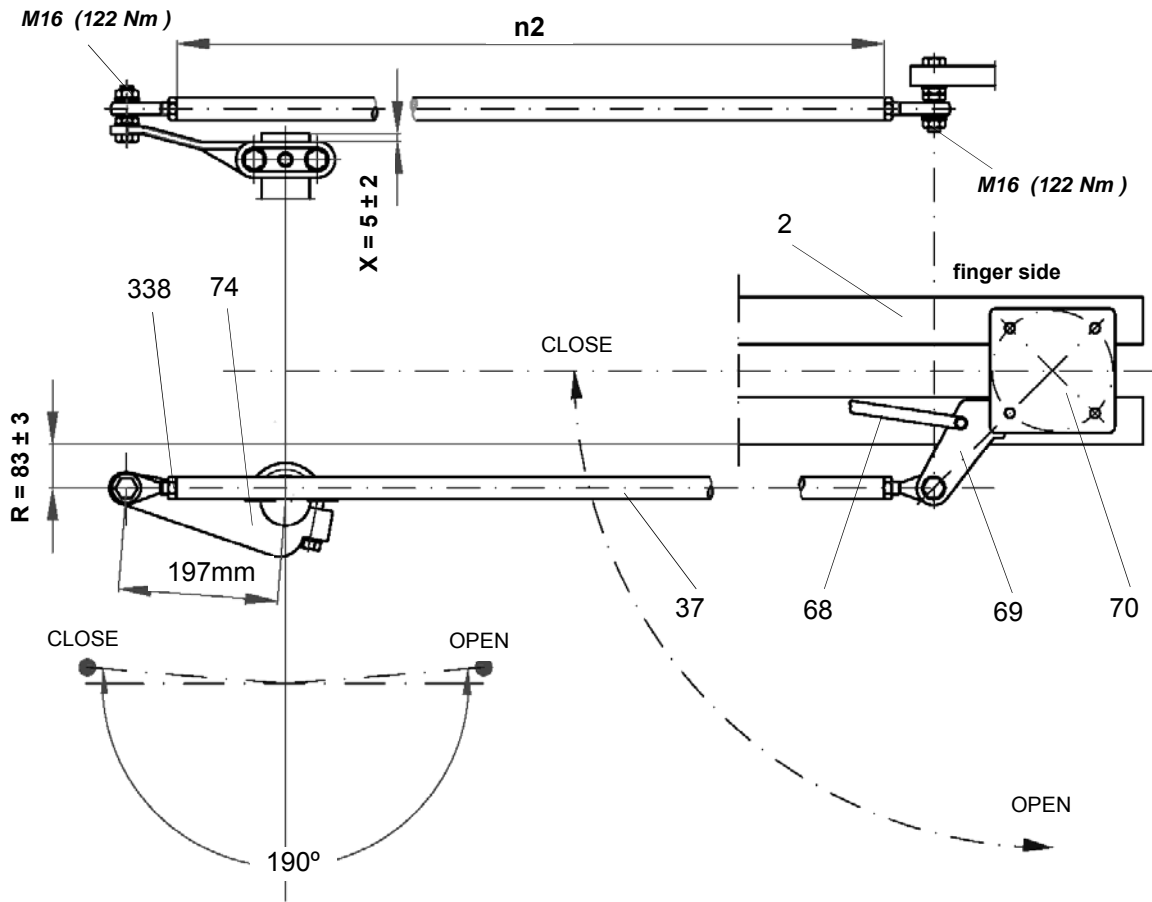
Mounting of coupling of disconnectors: Disconnector poles in parallel
